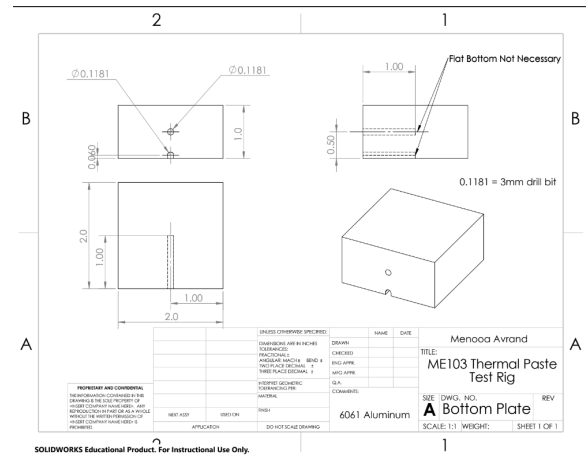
Mechanical drawing of the bottom block of our experimental setup. The bottom semicircular hole ensures the block is flush with the hot plate when the thermocouple is inserted.
